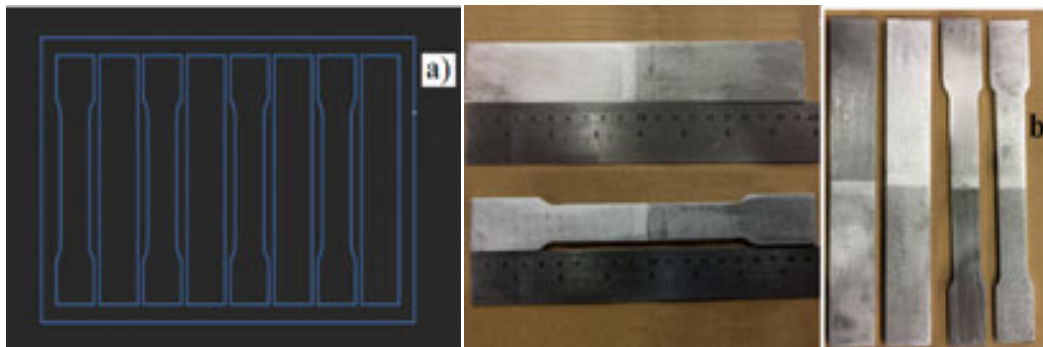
a) CAD drawing of the test specimens b) Macro image of test samples
